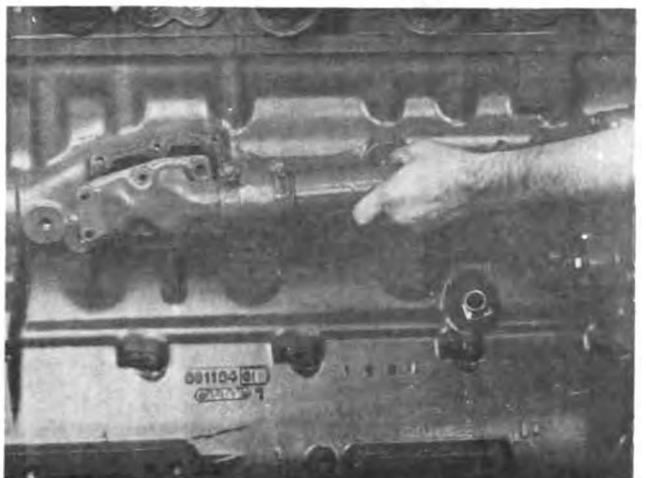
(N100141) Remove The Water Connection And Transfer Tube.
